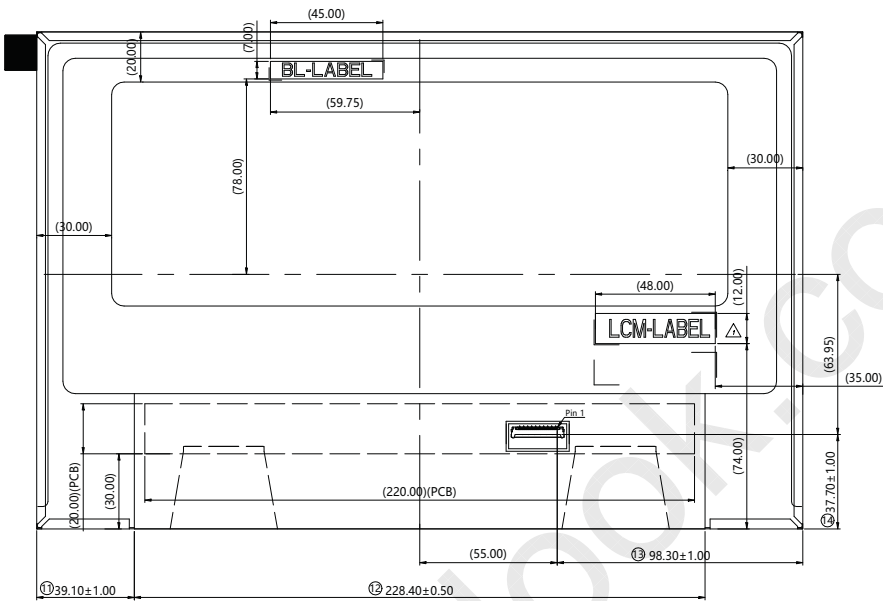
TFT-LCD Module Outline Dimensions (Rear view)
